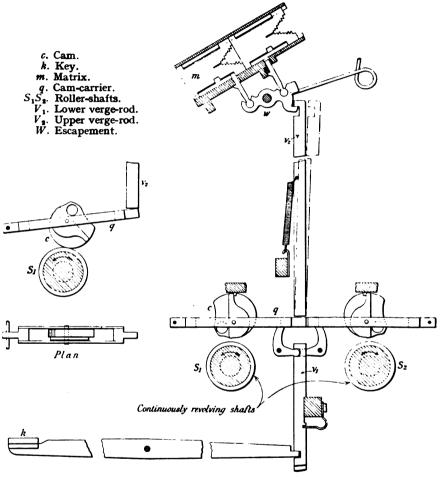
Linotype ; matrix-liberating gear. Scale : half size.
